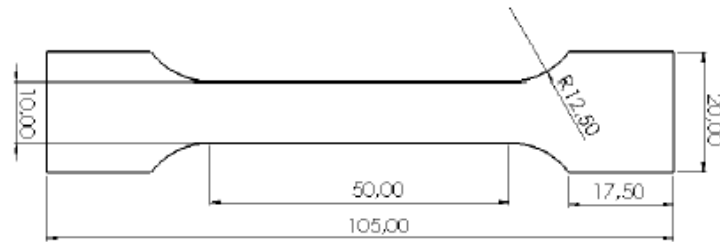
Geometric dimensions of tensile test specimens (dimensions in mm)
